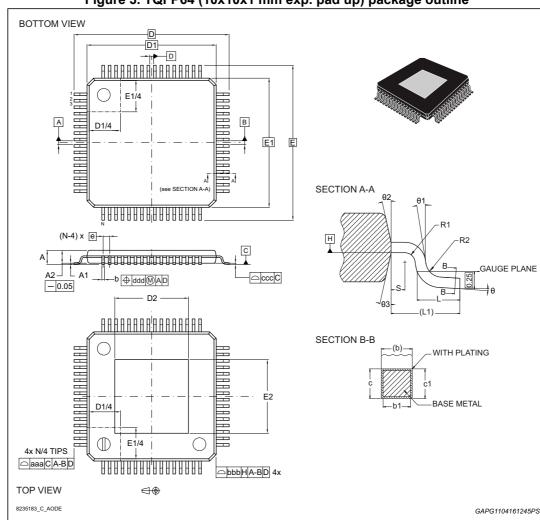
TQFP64 (10x10x1 mm exp. pad up) package outline
